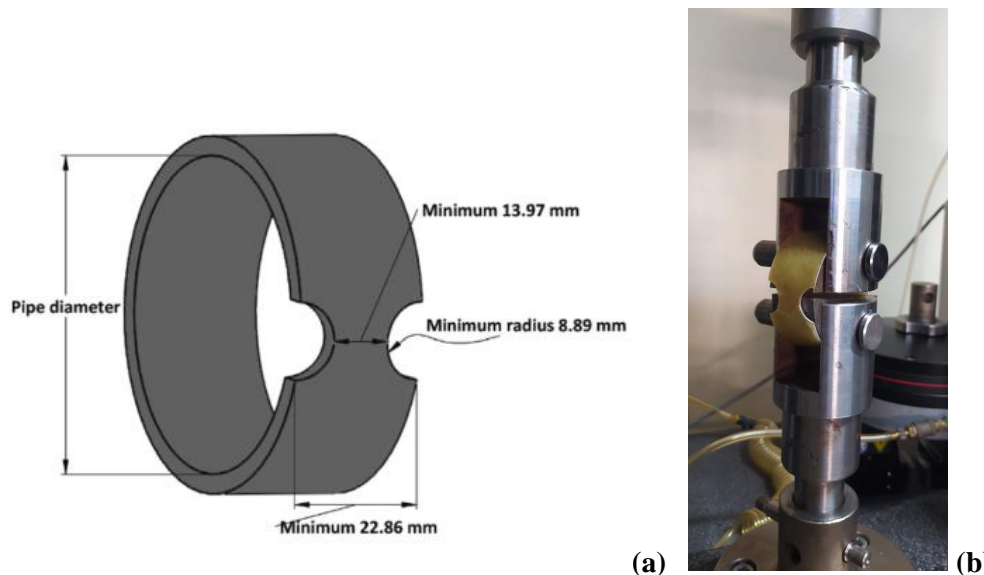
(a) Dimensions of the test specimen, and (b) Apparatus for the testing according to ASTM D2290-19 standard. [8].
